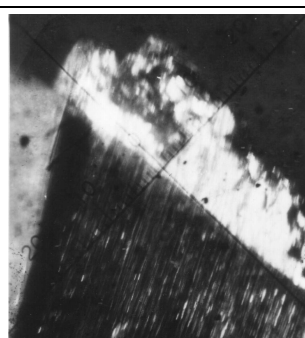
Deposition on cutting edge after cut with $v = 180\text{m/min}$
